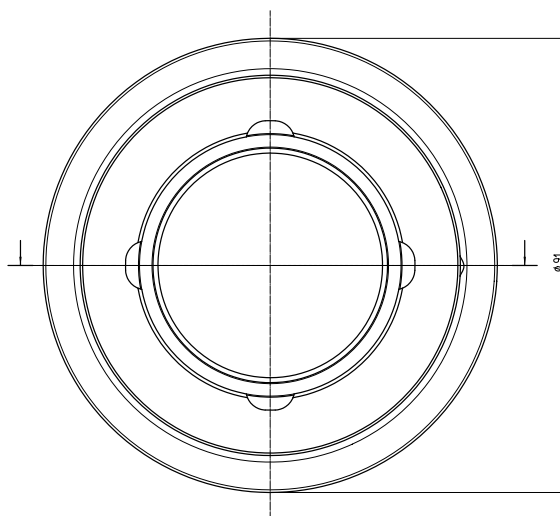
Adapter flange, weldable (suitable for PS = 10 bar) in mm
